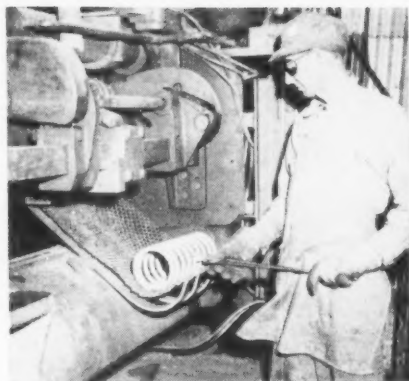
Coiler's helper "tonging" formed springs to re-heating furnace.
